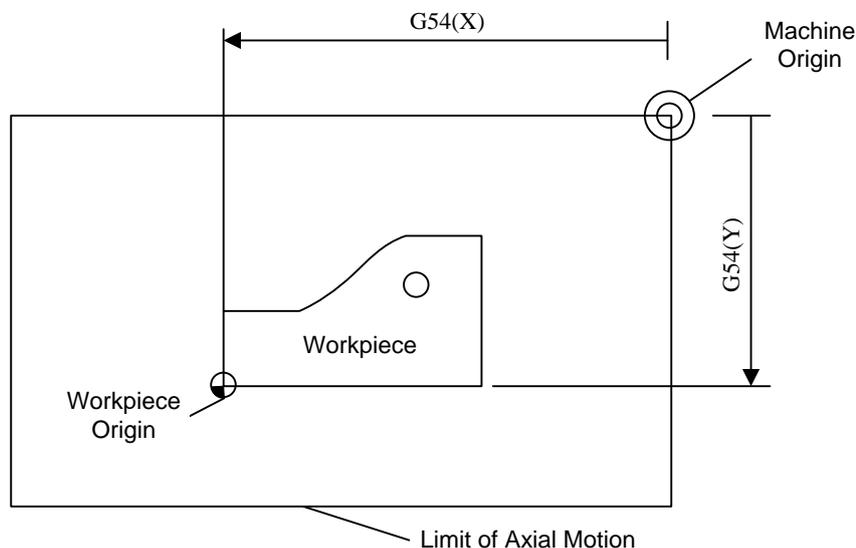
The relation between workpiece offset and machine coordinate system
